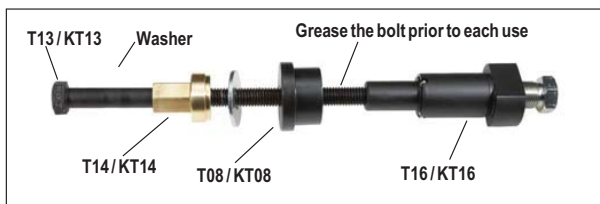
LONG GUIDE PIN BUSHING INSTALLATION AND DIMPLING TOOL
